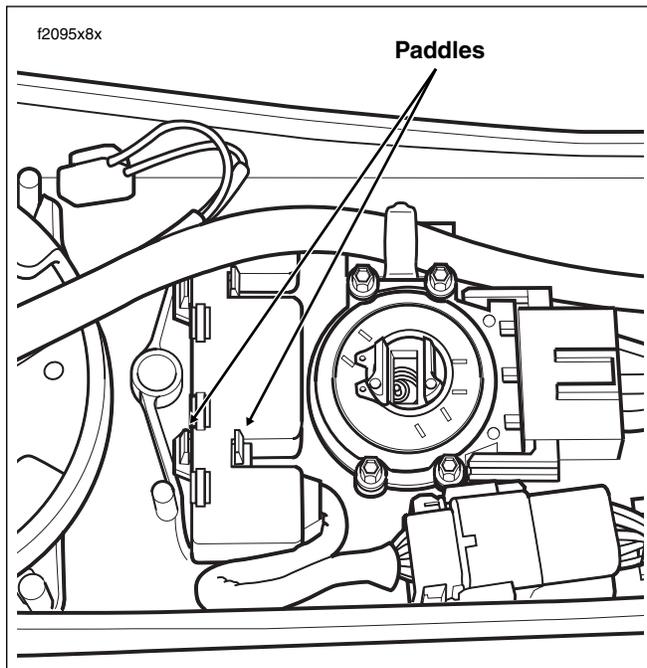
Release Paddles to Free Indicator Lights Assembly (FLHR/C)
